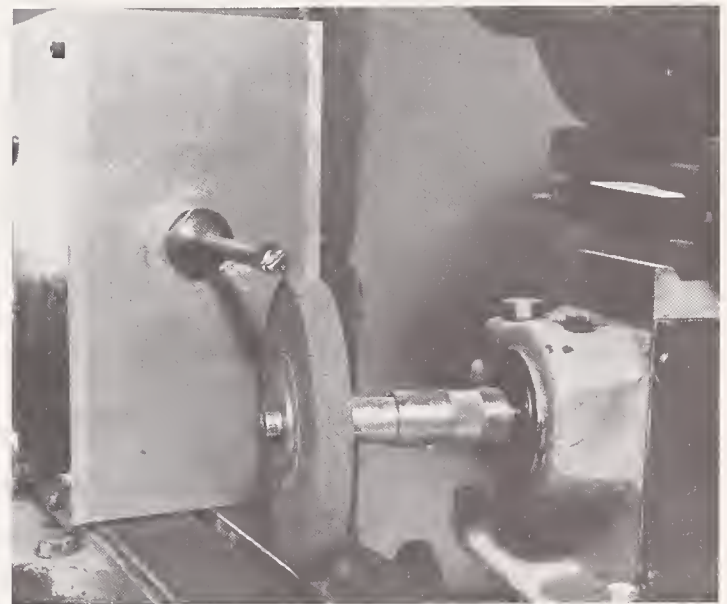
Detail view of P-7 tool and wheel for peripheral cutting.
